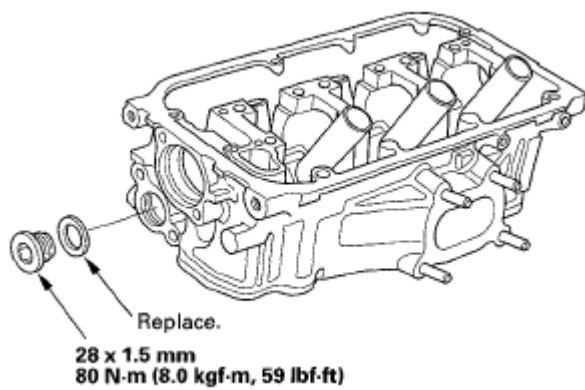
Identifying Sealing Bolt Washer - Front With Torque Specifications
